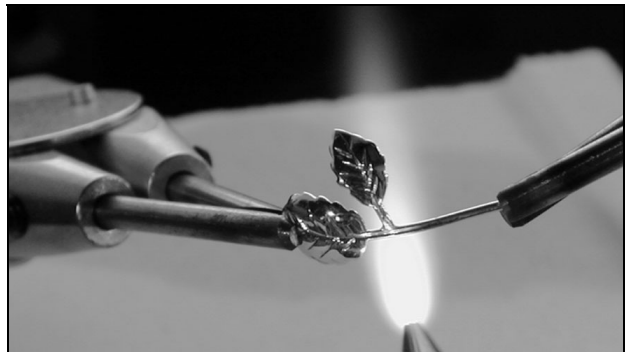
With medium solder (1500 C), each leaf element is attached to its center wire connector.
